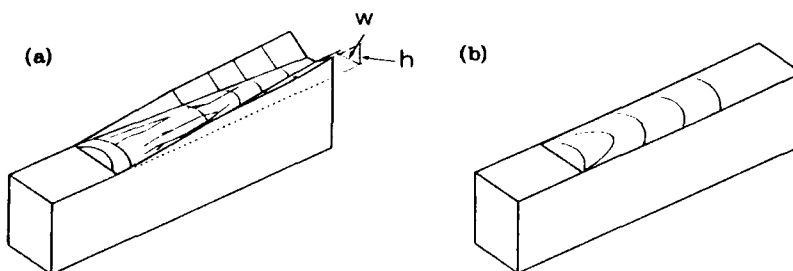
Schematic illustration of fracture surfaces under (a) 1 kgf/mm² and (b) high pressure.
